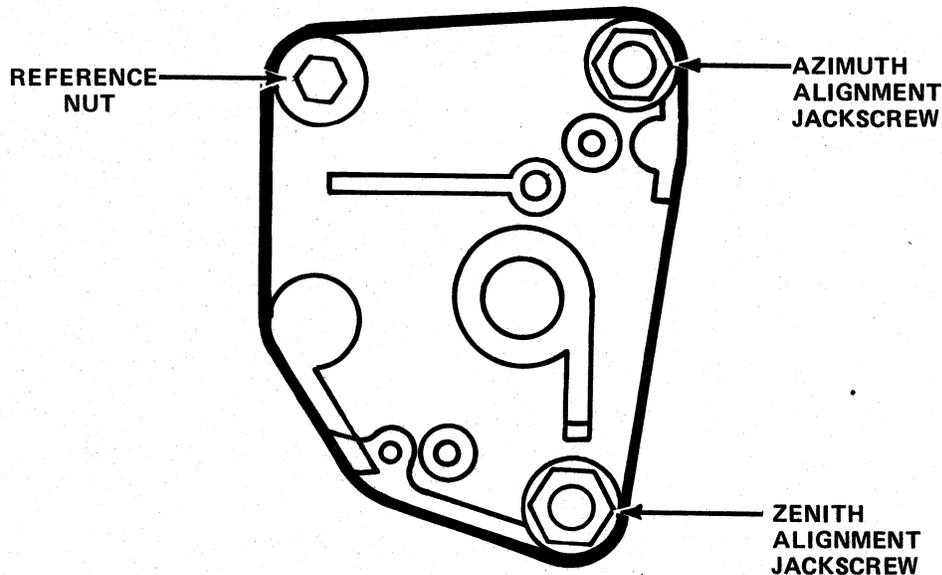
Jackscrew Locations on Head Carriage Assembly
